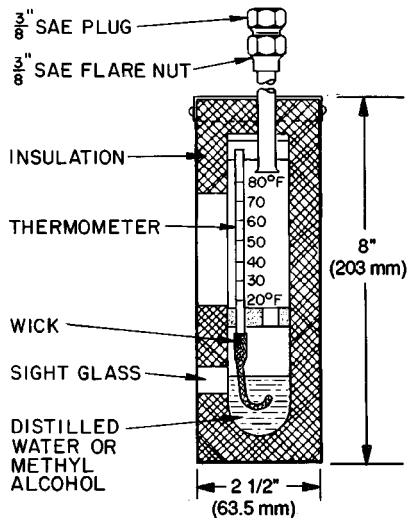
Typical Wet-Bulb Type Vacuum Indicator
